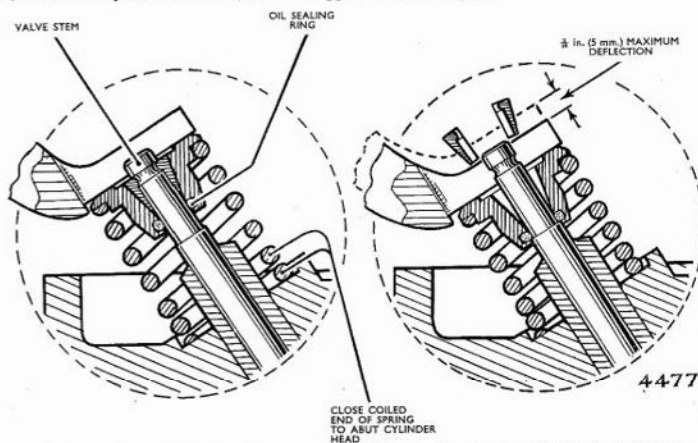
Correct use of valve spring compressor when fitting the valve spring, cup and sealing ring to the valve
